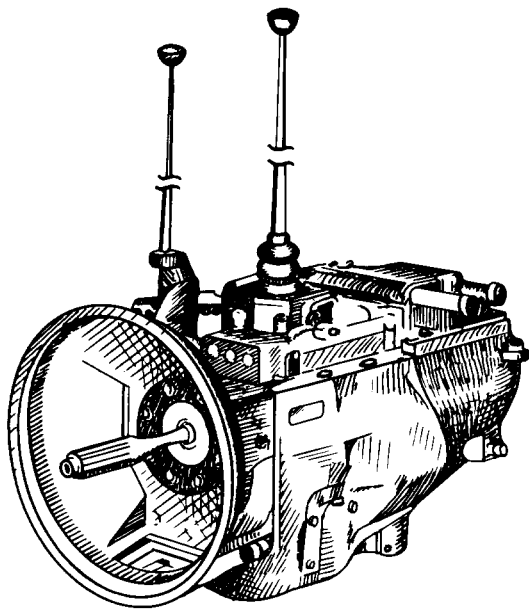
A Packaging Engineer Consideration—Advantages and Disadvantages of Disassembly
